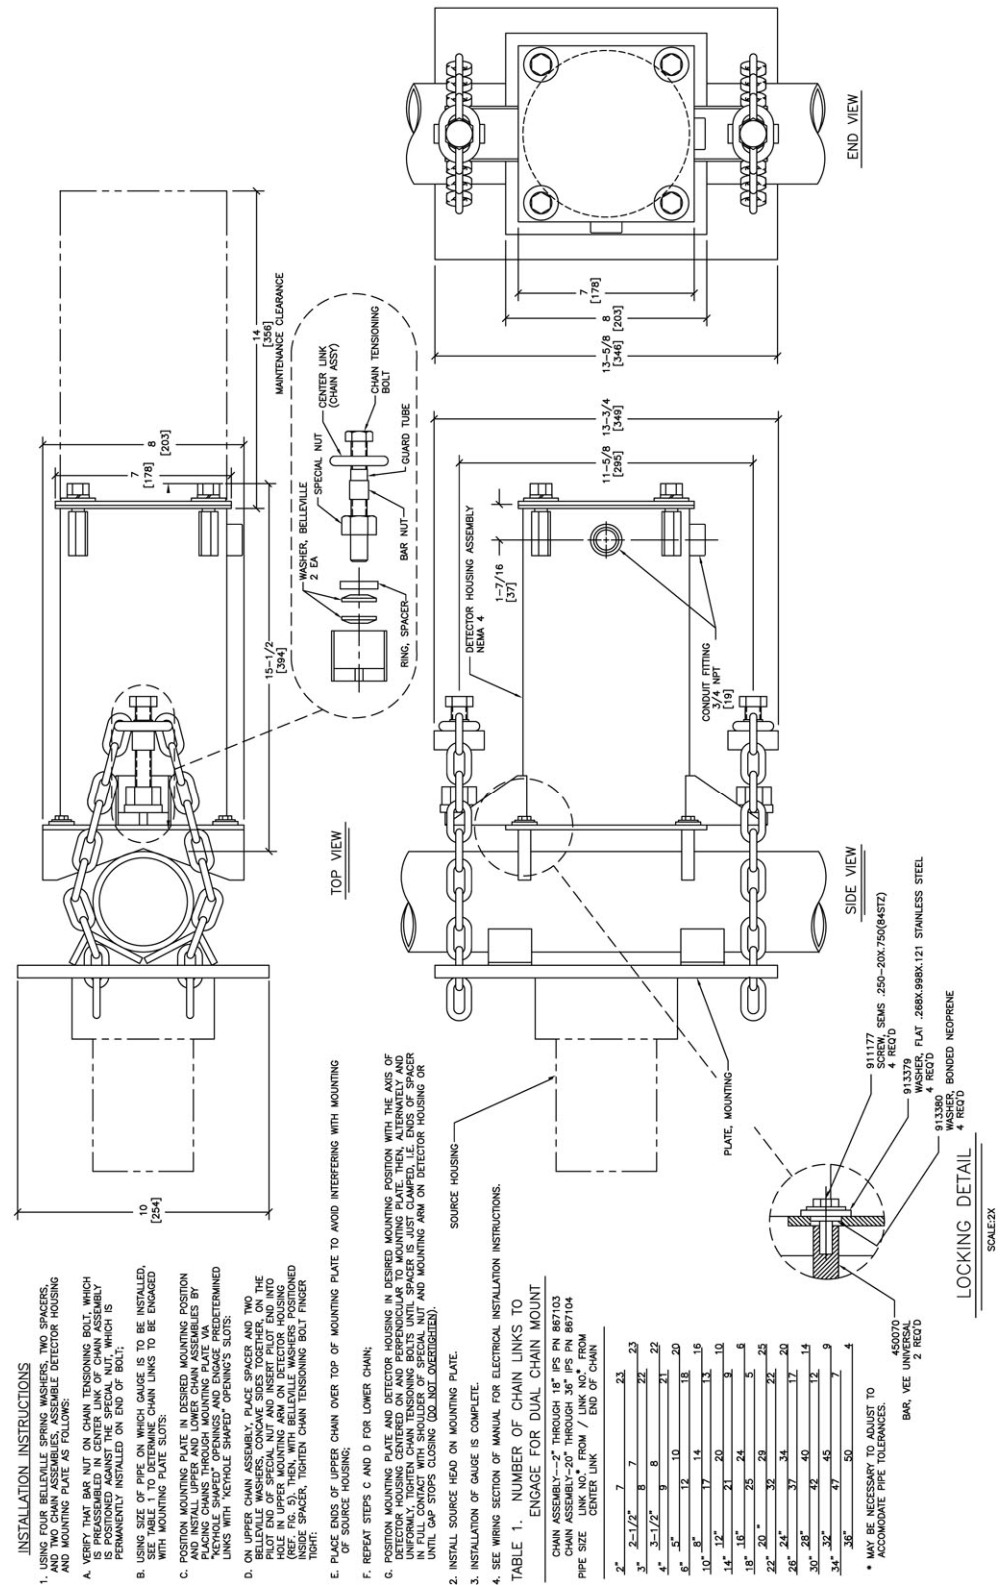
867466: Installation drawing, source/detector assembly dual chain mount, NEMA 4 housing (sheet 1 of 1)
